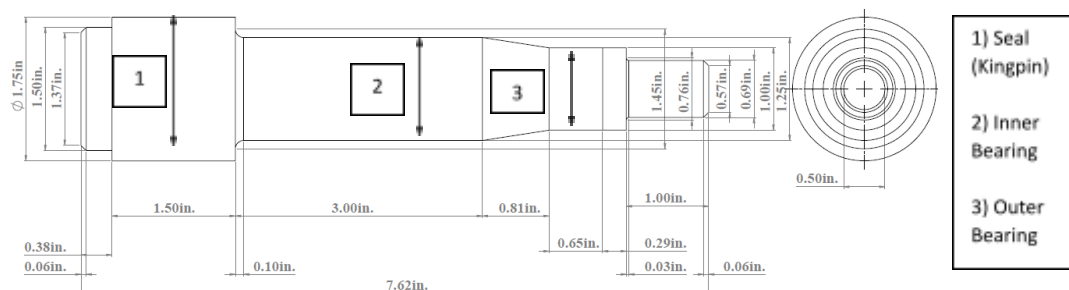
CAD Drawing of Spindle, courtesy of the Triton Solar Car Team
